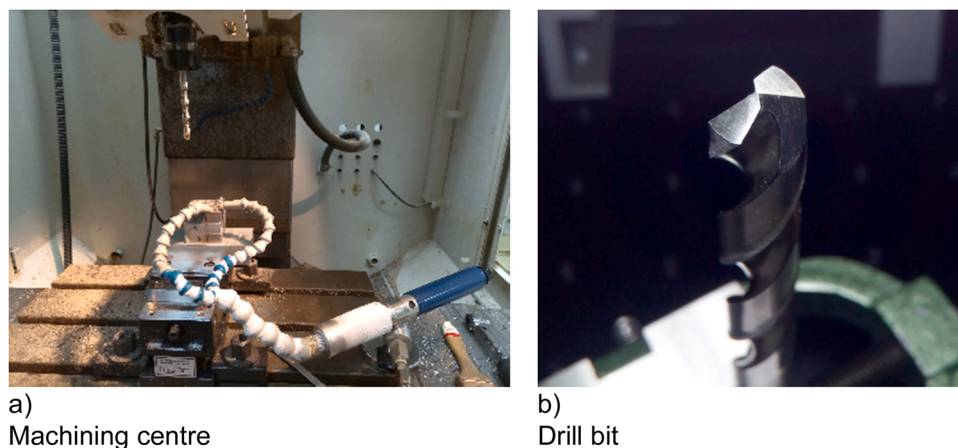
Machining centre, tool: (a) Machining centre; (b) Drill bit.
